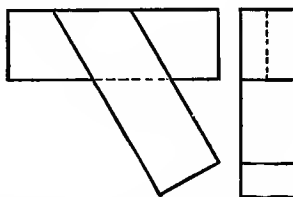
Mechanical Drawing of Brace or Angle Joint
